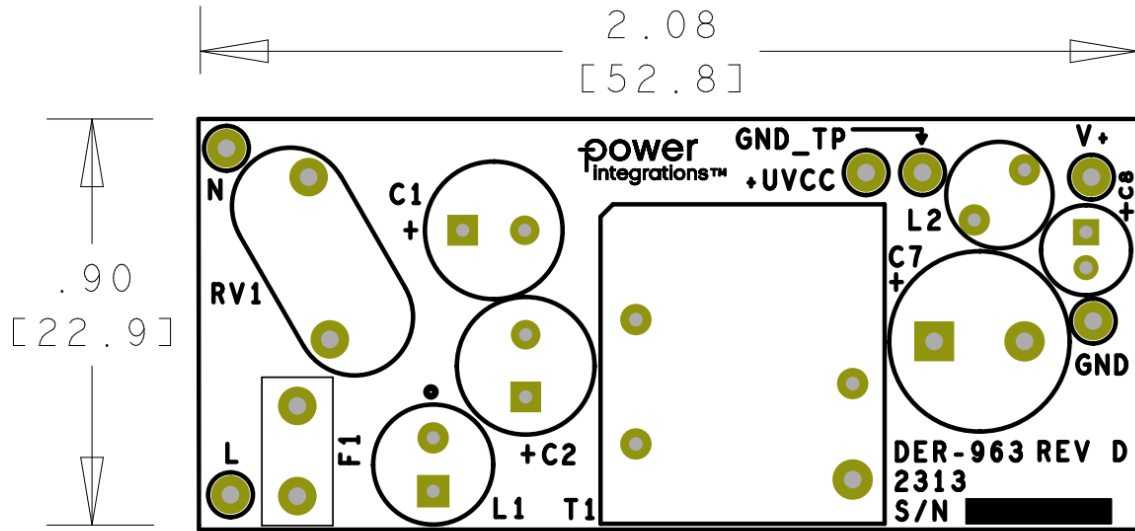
Printed Circuit Layout, Top (2.08" [52.8 mm] L x 0.9" [22.9 mm] W).
